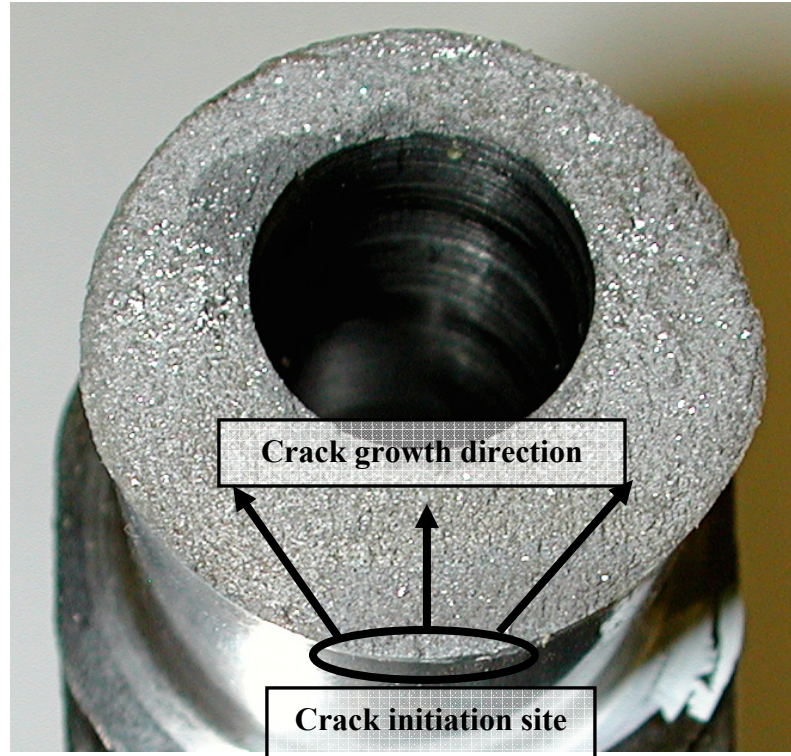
Example of a typical fatigue fracture surface for the cast iron crankshaft.
